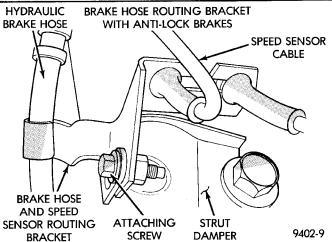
Brake Hose And Speed Sensor Cable Routing Brackets
